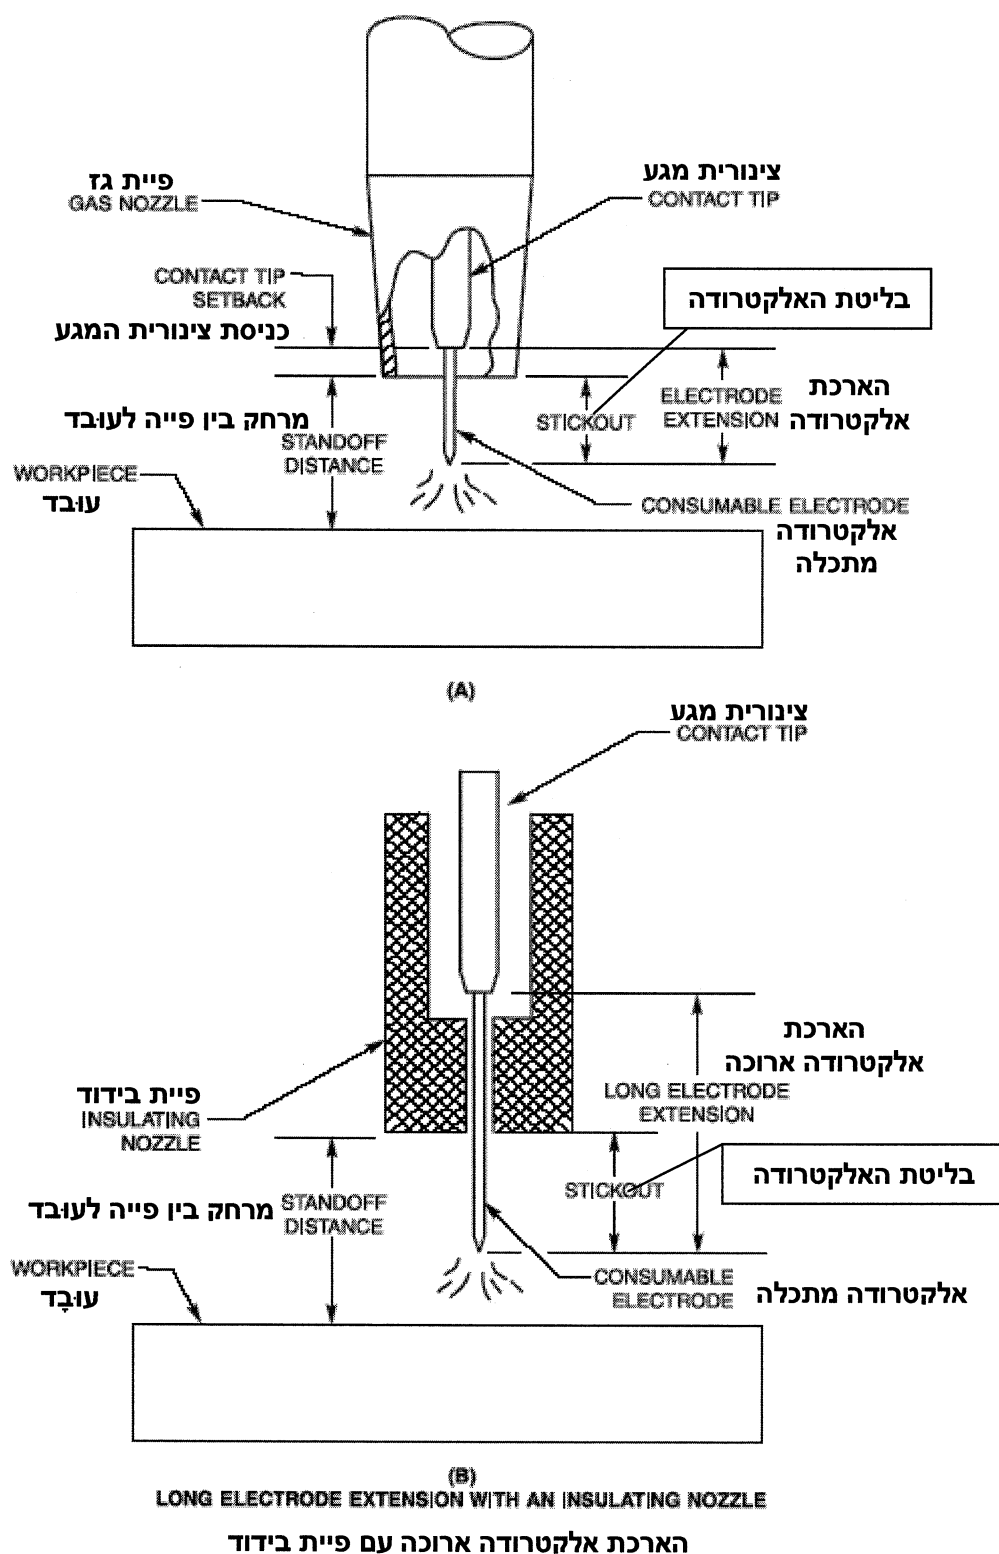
Gas Metal Arc and Flux Cored Arc Welding Gun Nomenclature
